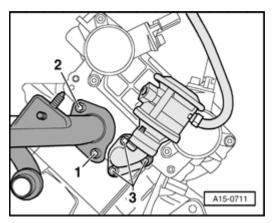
Removing Bolts And Combination Valve For Secondary Air Injection With Flange From Cylinder Head
